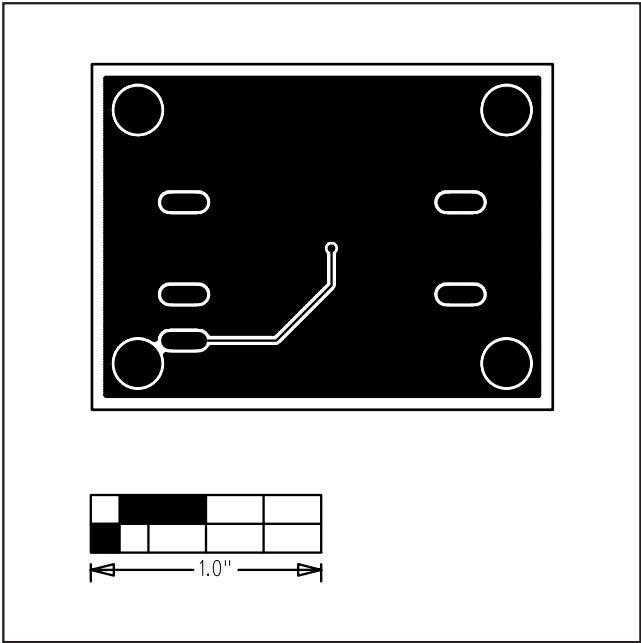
MAX9928 EV Kit PCB Layout—Solder Side
